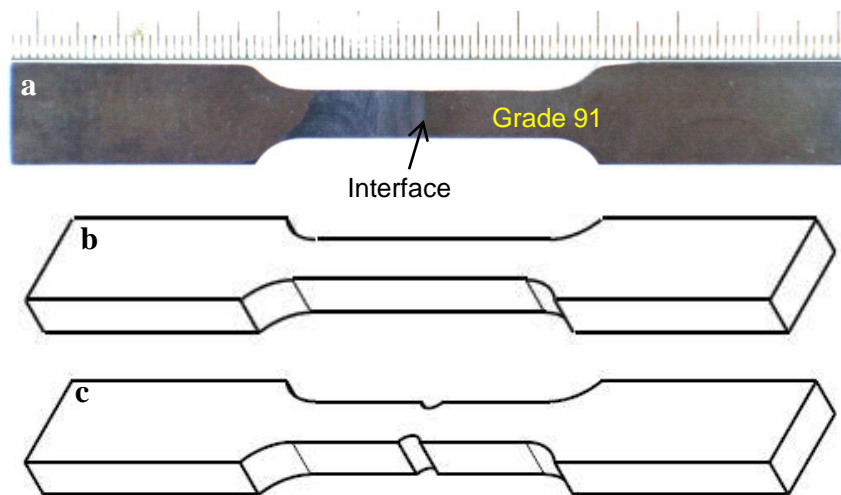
(a) A machined straight-shank tensile specimen, (b) its three-dimensional illustration, and (c) three-dimensional illustration of the notched tensile specimen.
